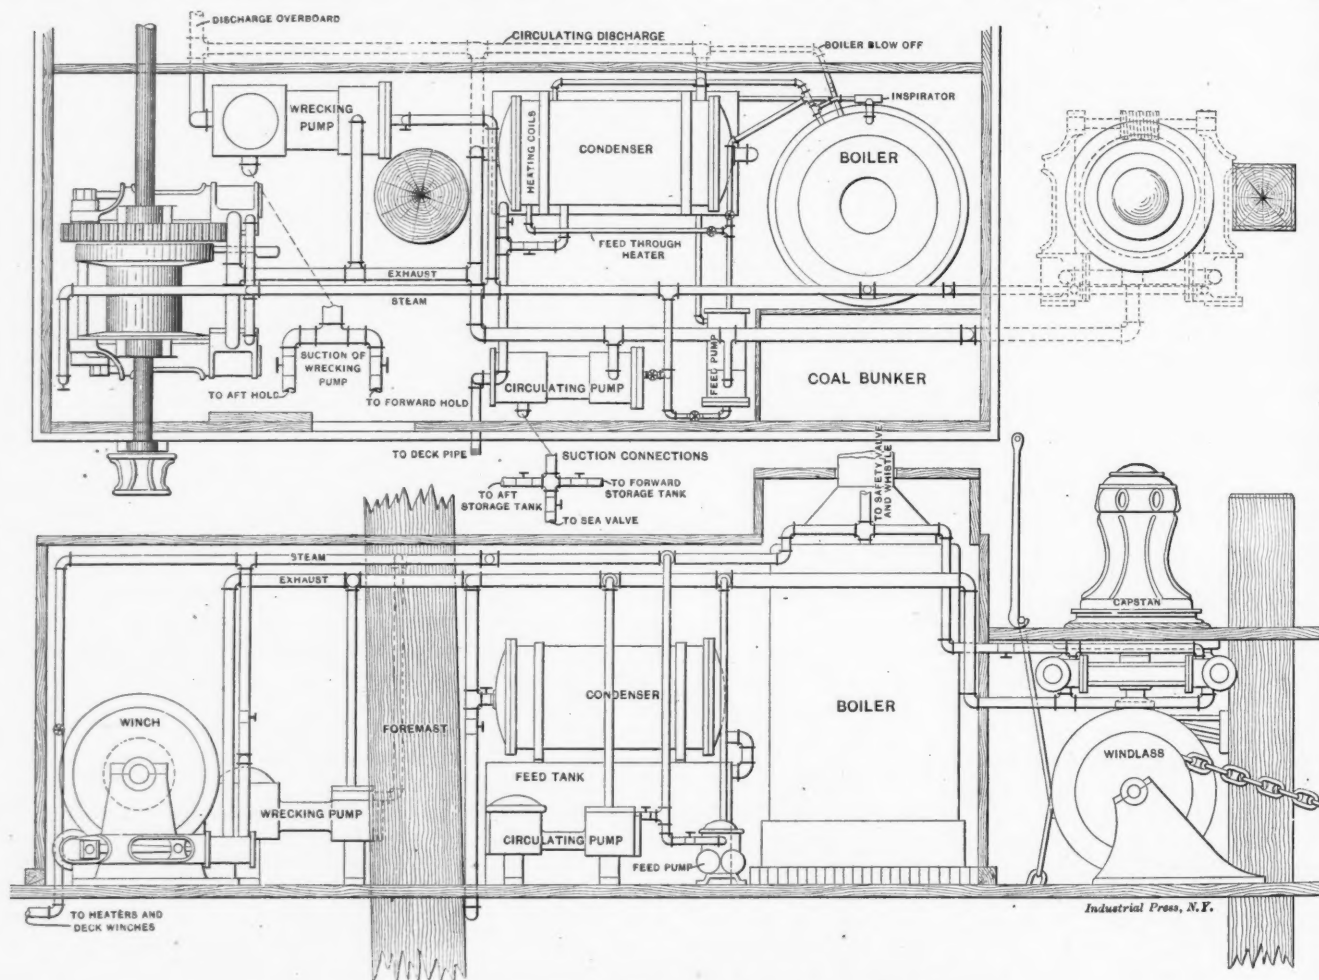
Plan and Elevation of a Typical Steam Outfit for a Modern Schooner.
